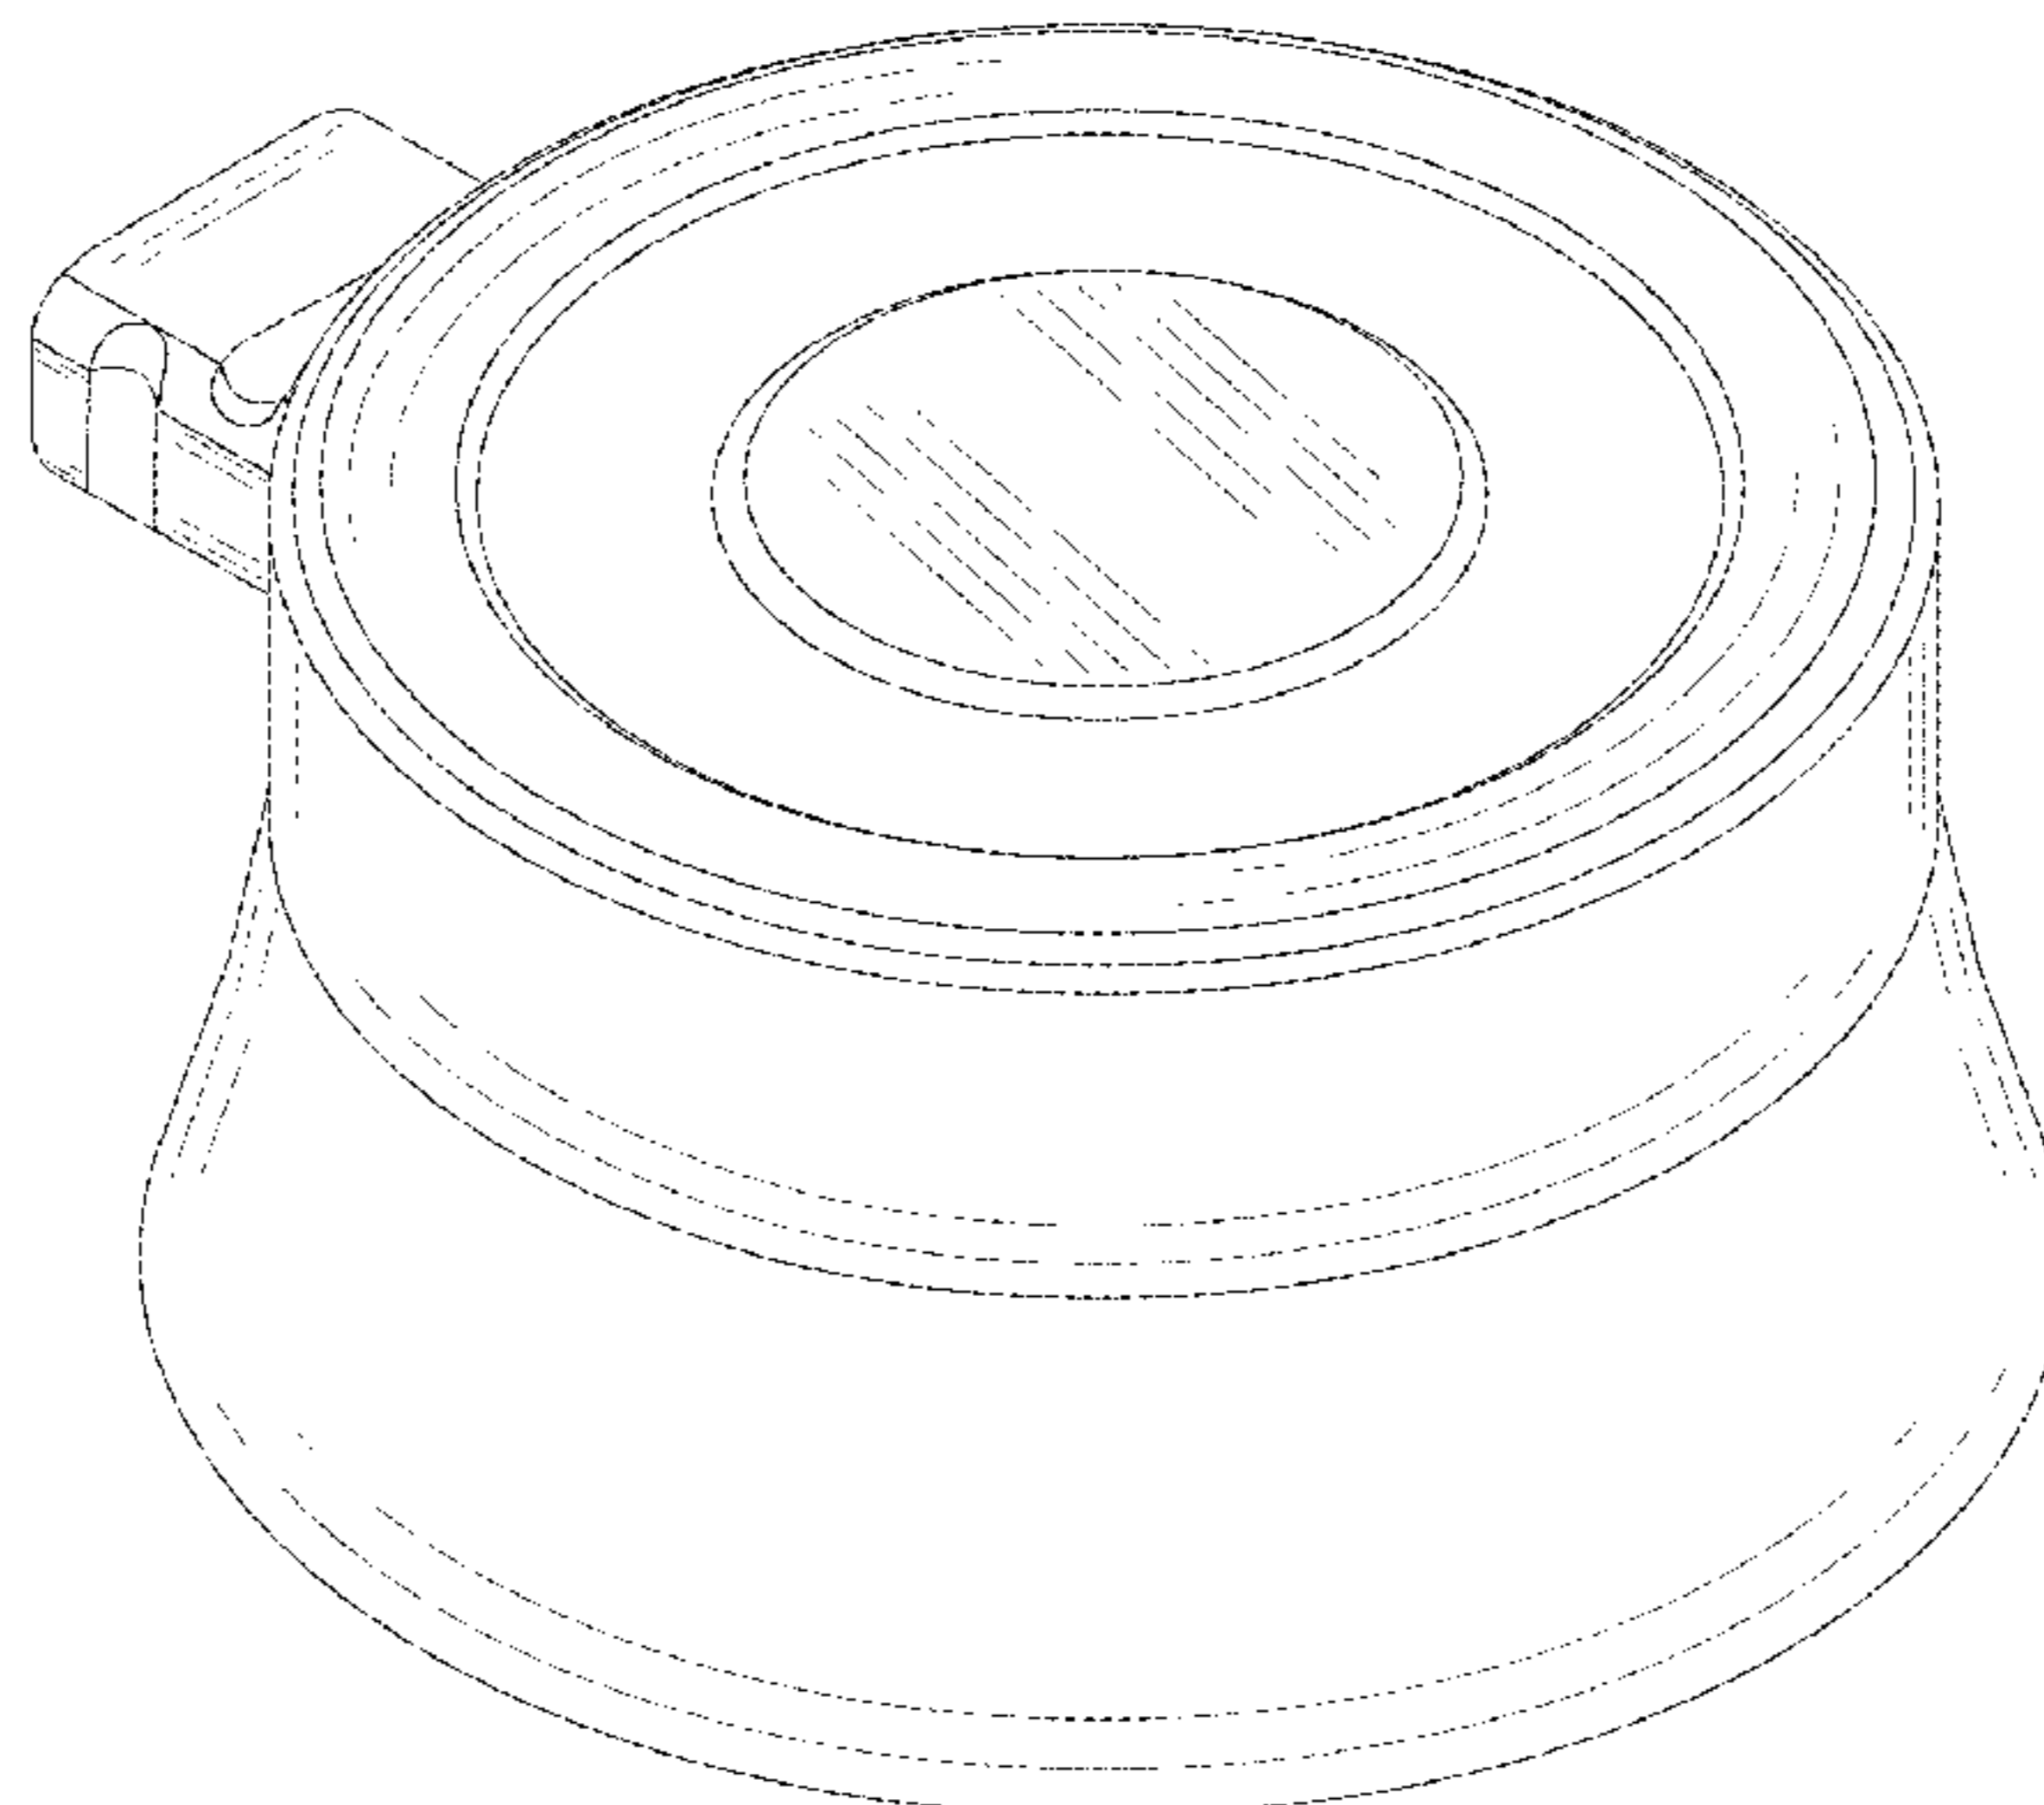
is a front elevation view of a magnetic charging head showing the new design;
